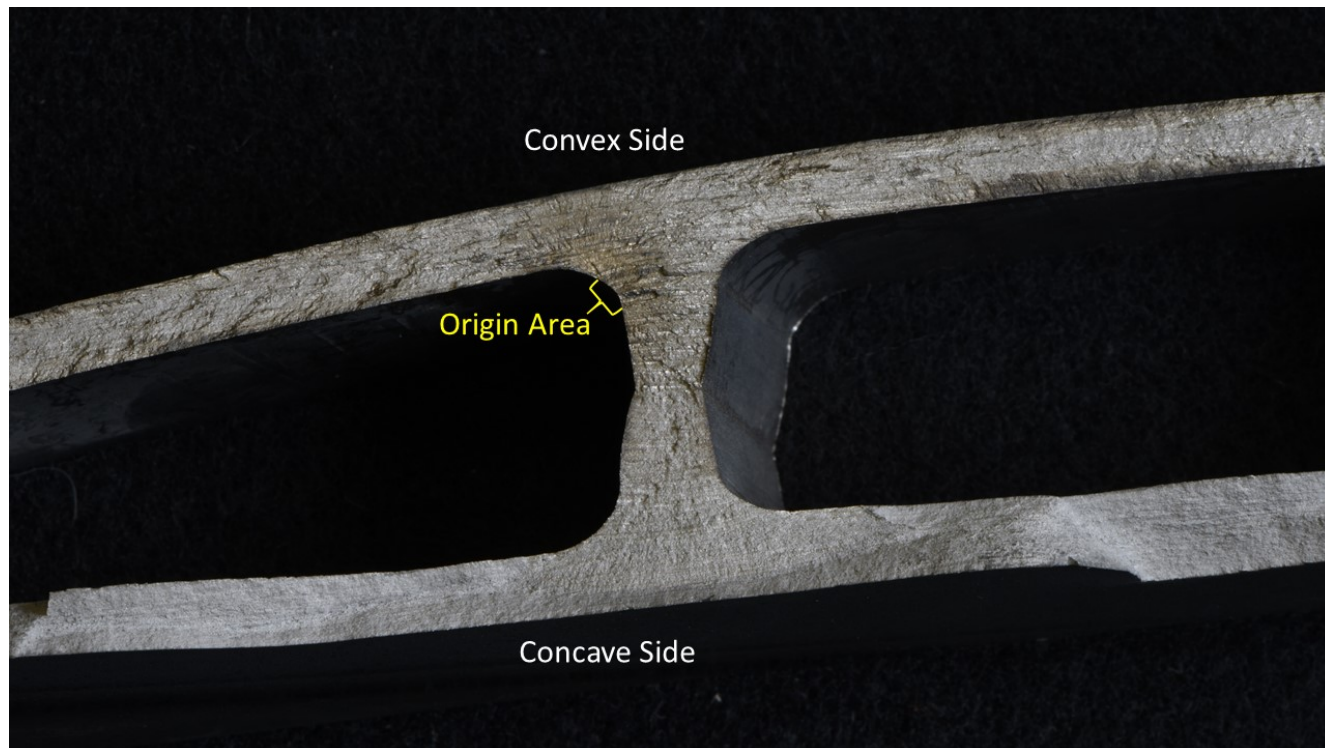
Photo of the fan blade's fracture surface with the origin area identified.
